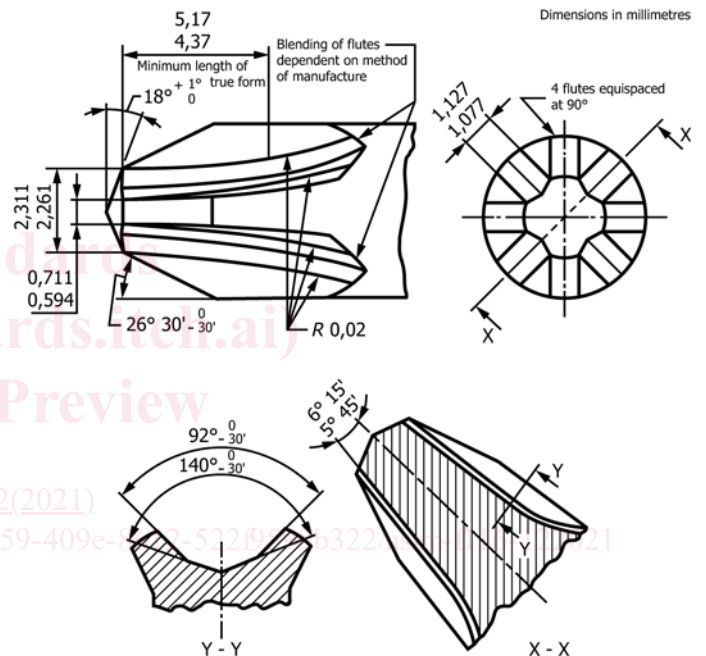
Dimensions and Tolerances of Cross-Slot (Modified Phillips) Screwdriver Bit
